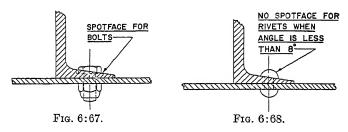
68 shows the tapered part being attached by rivets. Here it is unnecessary to spot-face when the angle of taper is 8 deg. or less. For angles over 8 deg., the part should be spot-faced to provide a flat spot for the head. It has been proved by tests that, up to 8 deg., the strength of the rivet is not affected by letting the manufactured or bucked head conform to the slope of the part.
